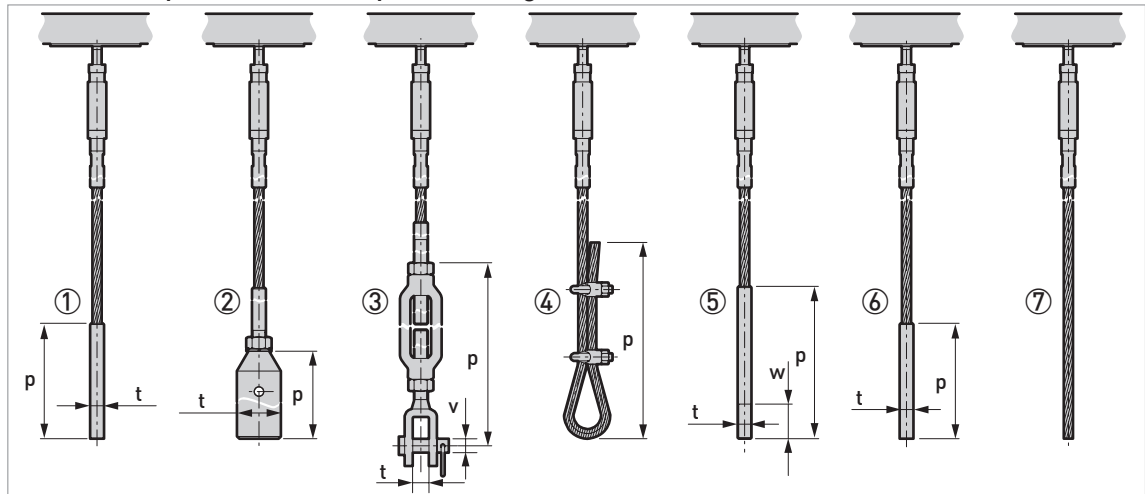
Probe end options for cable probes: single cable Ø8 mm / 0.32"
